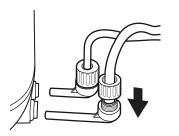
Tightening Fitting Nuts to Connector Fittings
